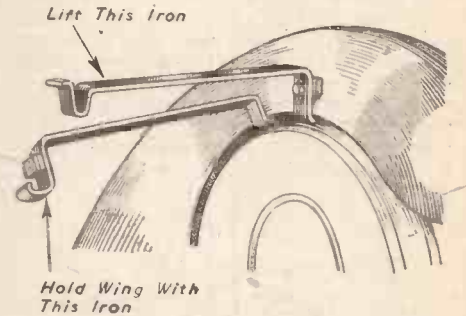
A useful pair of wing irons. One iron is shown in position for pulling the edge of the wing outward, while the other is used for steadying purposes.
